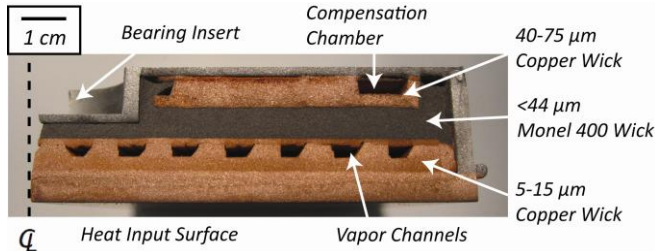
Cross-sectional photograph of a prototype evaporator, showing the three-layer wicking structure. The centerline of the evaporator is shown for reference; an insert is made in the evaporator frame for the impeller shaft bearing. The insulating wick (<44 μm, Monel 400) separates the vapor channels and compensation chamber, which are formed as channels within the high conductivity (5-15 μm, copper) and high permeability (40-75 μm, copper) wicks, respectively. The footprint and thickness of the evaporator are 10.2 cm x 10.2 cm and 1.6 cm, respectively.
